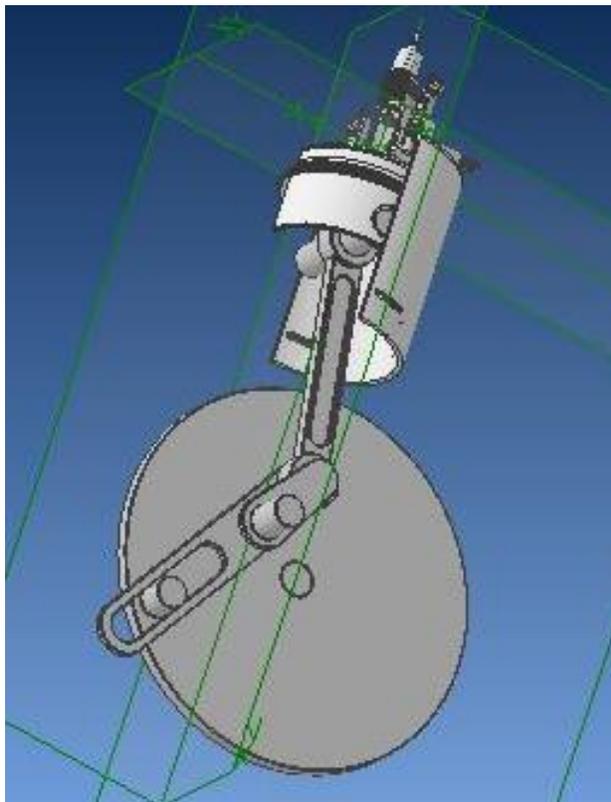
FAI is actually a single-stroke engine. Piston valves are contracted during return stroke to reduce frictional losses.
